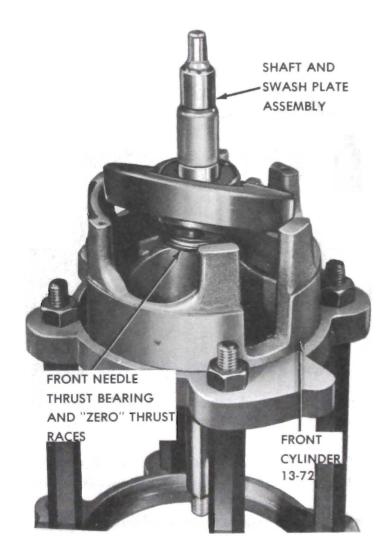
Shaft and Front Needle Thrust Bearing in Cylinder Half
